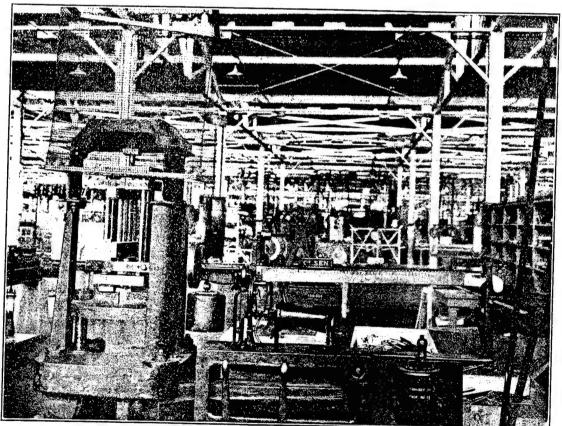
Compression Test Set-up with Short Screws in Jig.
